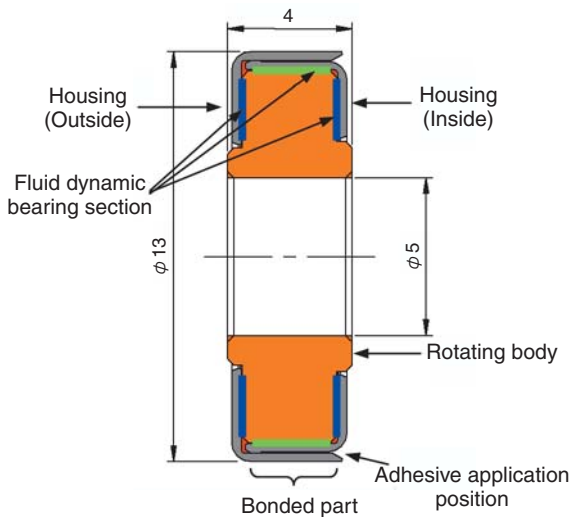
Cross-section shape of fluid dynamic bearing unit
